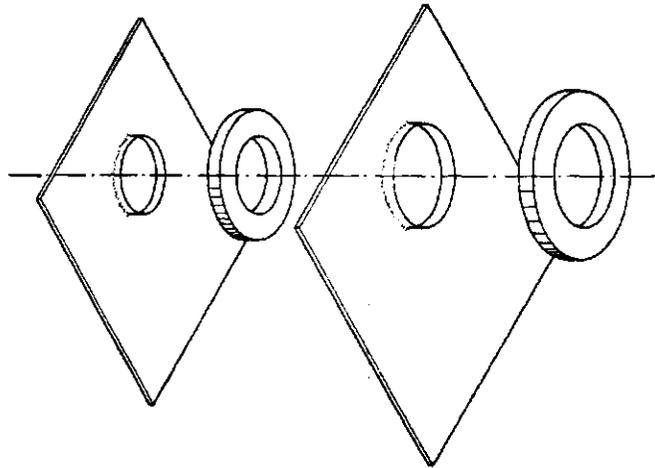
Method of ferrite core assembly for 40 kW h.f. transformer.
